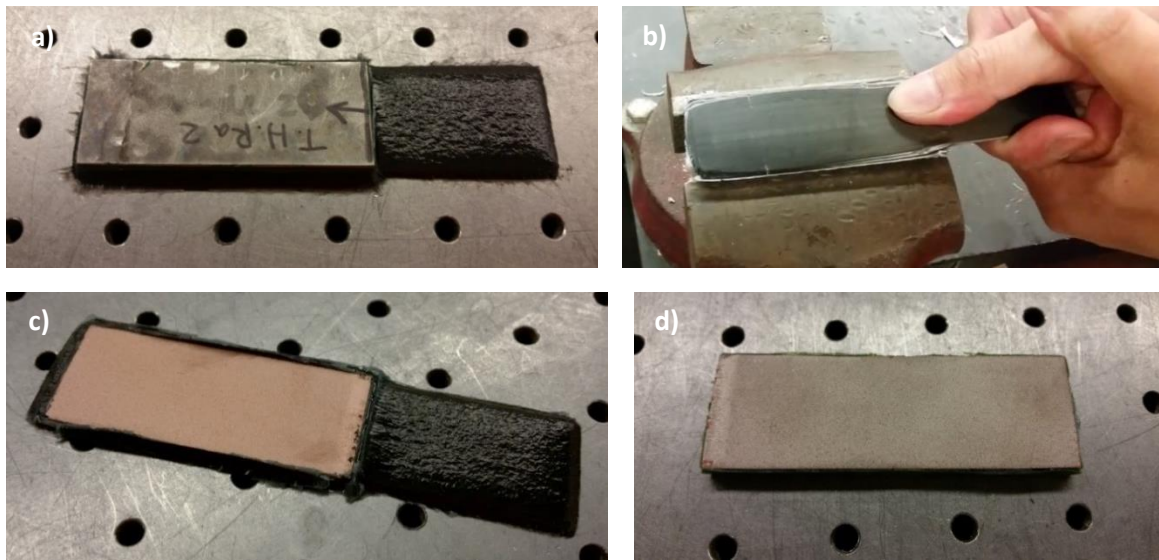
RL 1.2: a) Assembly before demoulding, b) Assembly in a vice, ready for demoulding, c) Demoulded copper coated CFRC, d) Mould after demoulding
